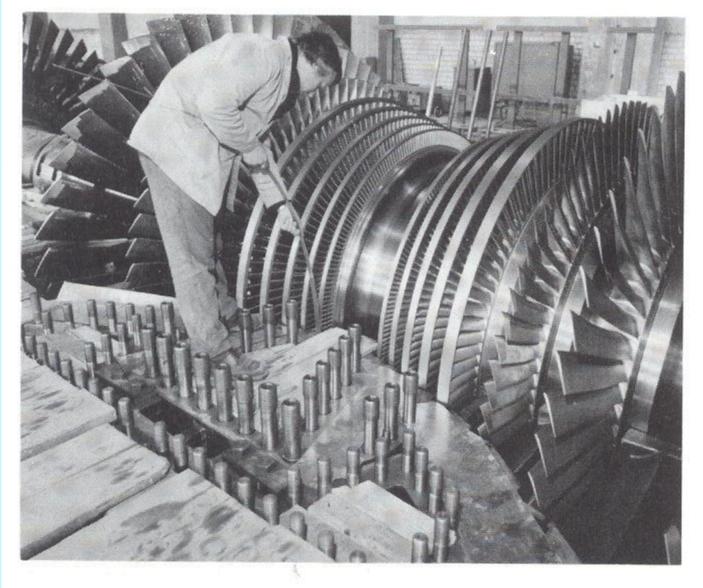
Measuring Radial Blade Clearance using Feeler Gauges
